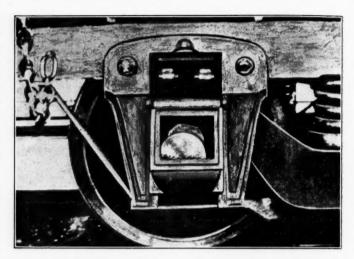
Tilting and Displacement of Brasses and Journals with Single Shoe Brake; Four-Wheel Truck
